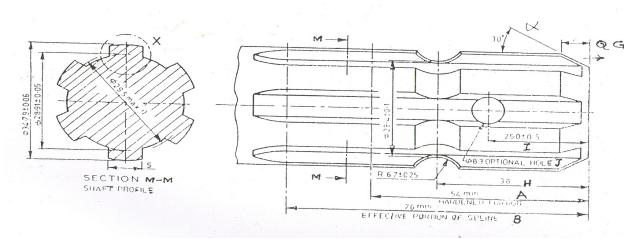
Dimensions of Rotavator Power Input Shaft, mm
